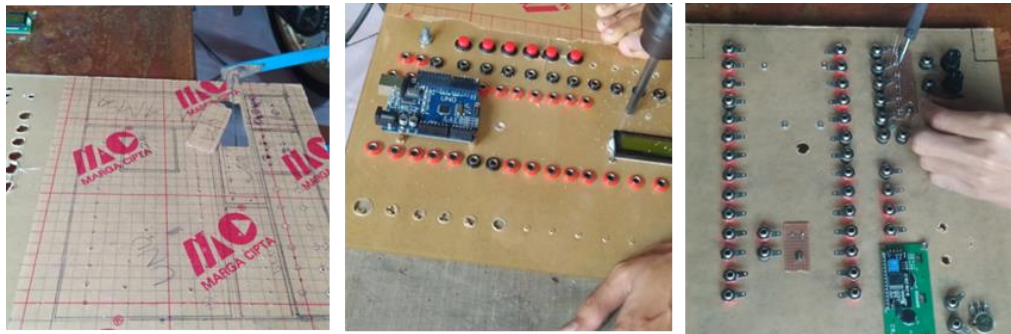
Process of Cutting Acrylic, Drilling Acrylic, and Soldering Component Feet
